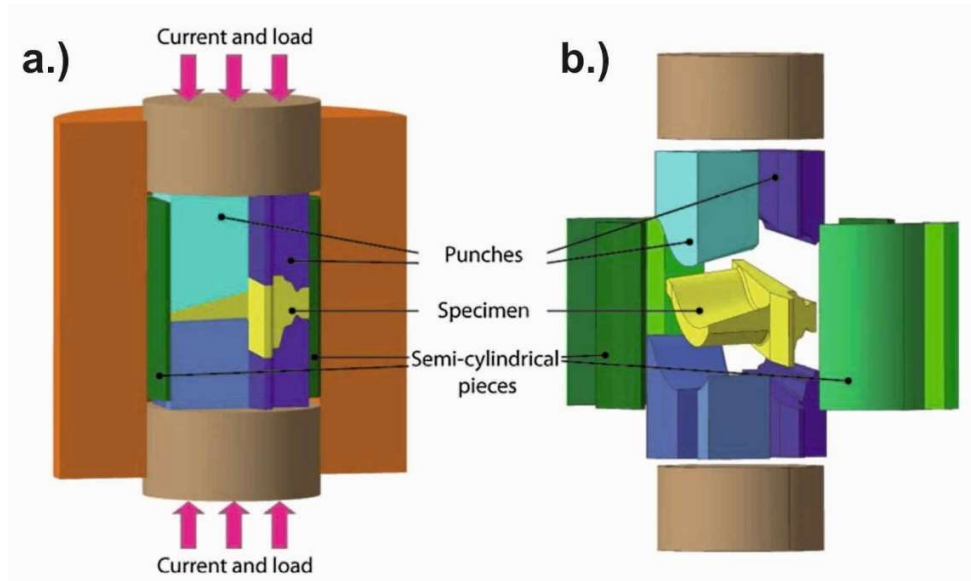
Schematic drawing of the graphite mold. a.) Punches in their final position, fully densified specimen. b.) Exploded view of the mold, illustrating how the punches and the pieces with semi-circular sections give its shape to the blade (30). (Reproduced with permission of Wiley-VCH).
